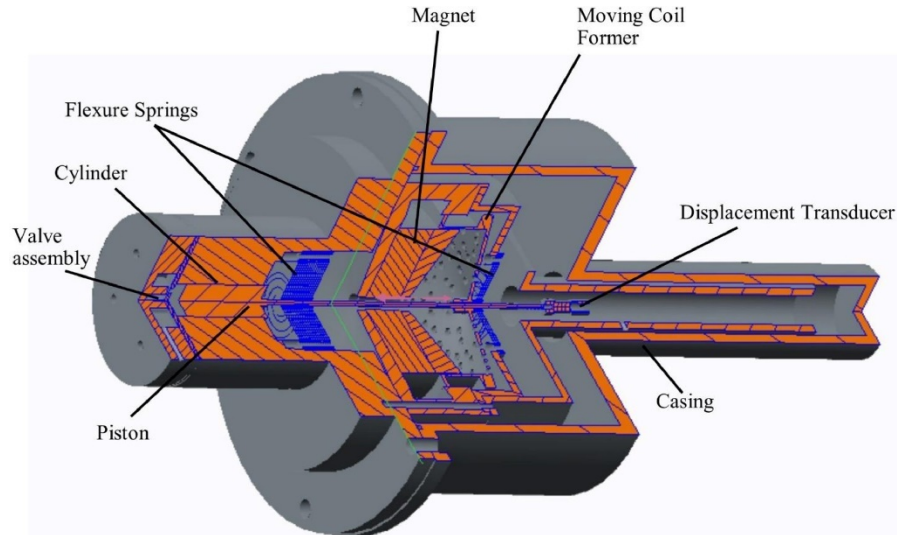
Moving coil linear compressor adapted from Zou [123]
